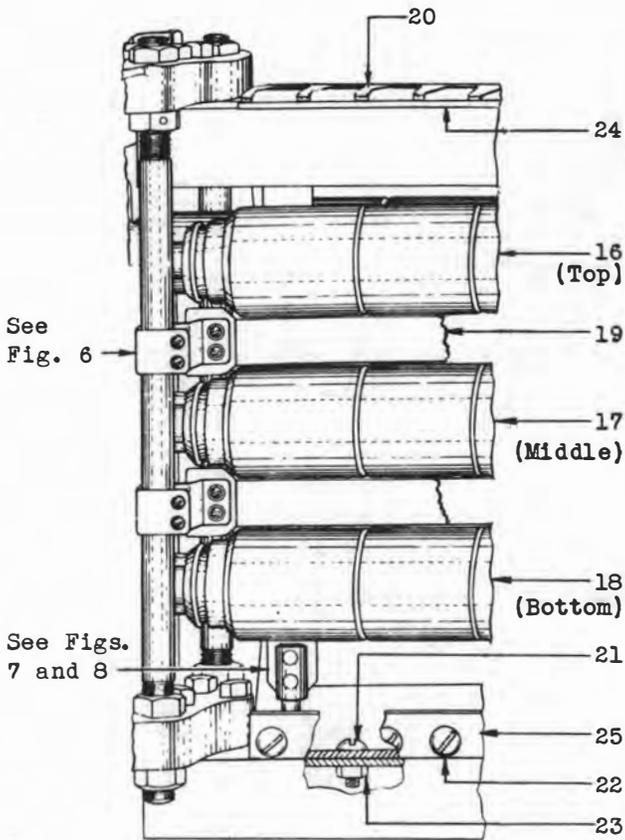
Friction Roll Assembly and Miscellaneous Parts
